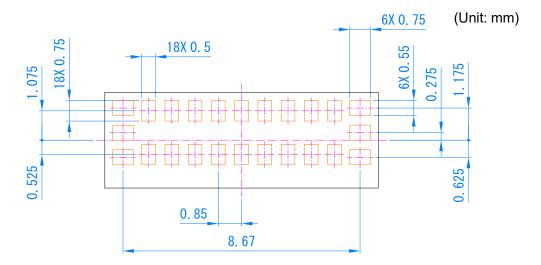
Recommended dimensions of the module footprint conductor layer pads (Top view)
